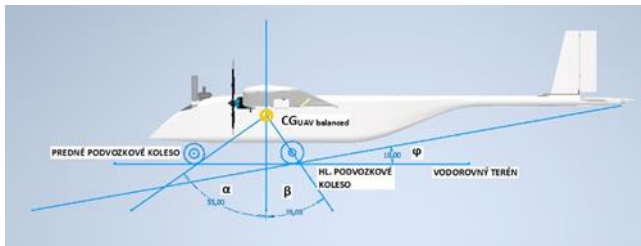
AutoCAD INVENTOR Landing gear position sketch
